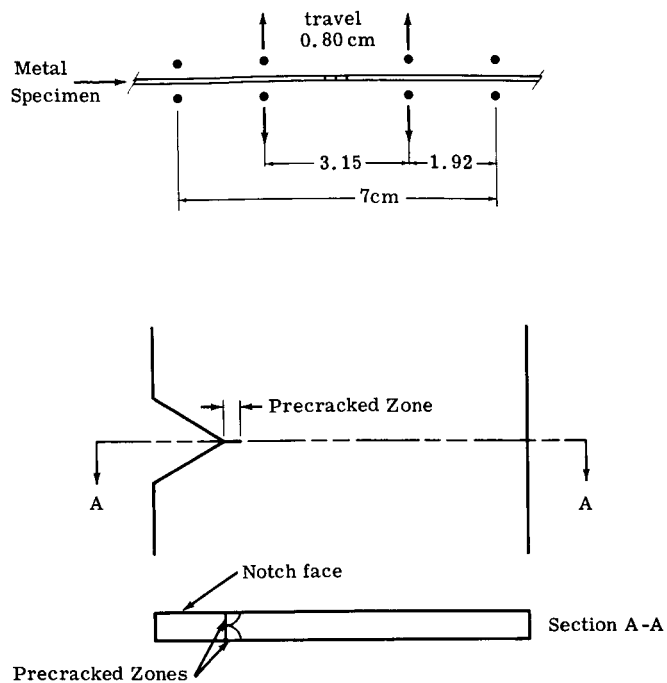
Dimensions of Flexing Device and Appearance of Fatigue Crack.
